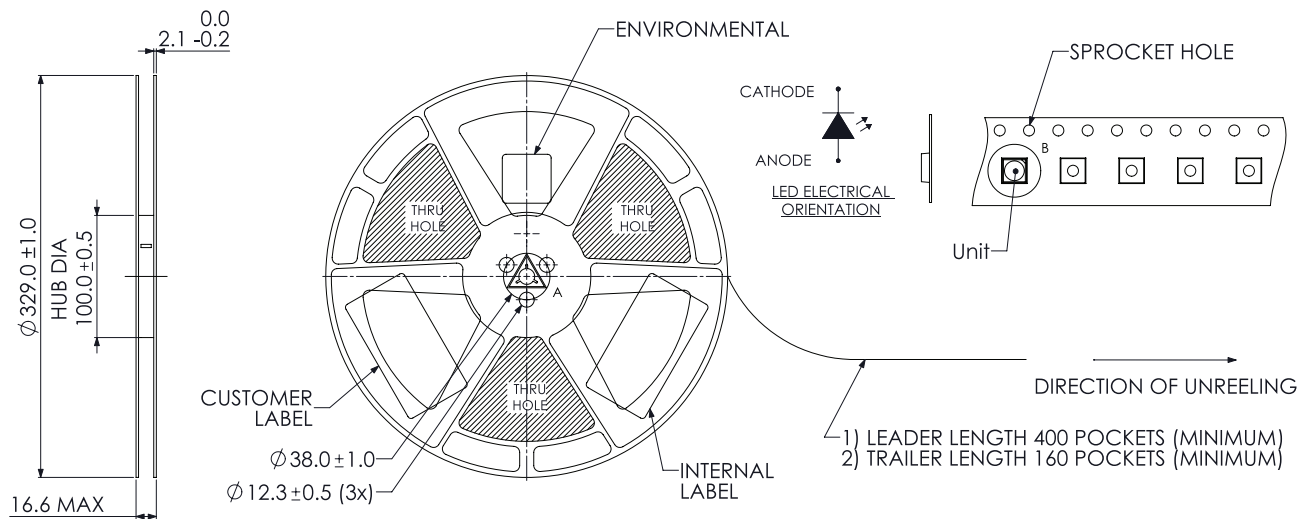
Reel dimensions for LUXEON Versat 3030 ST PCA 350
